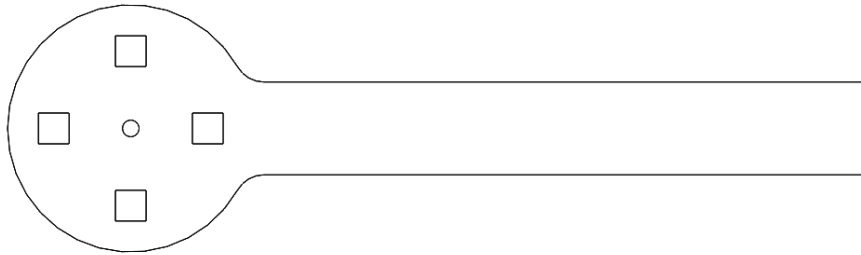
External part of the coupling. See Appendix D.4 for design drawings with dimensions.
